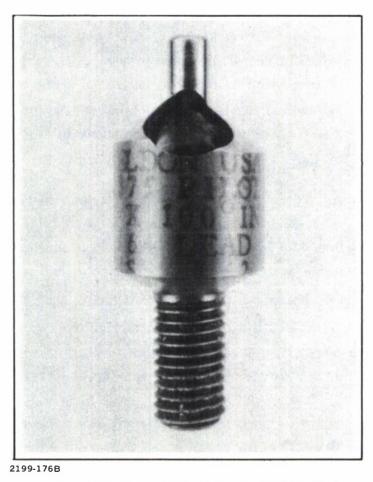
Weldon 100-Degree Countersink (3.5x Mag)
